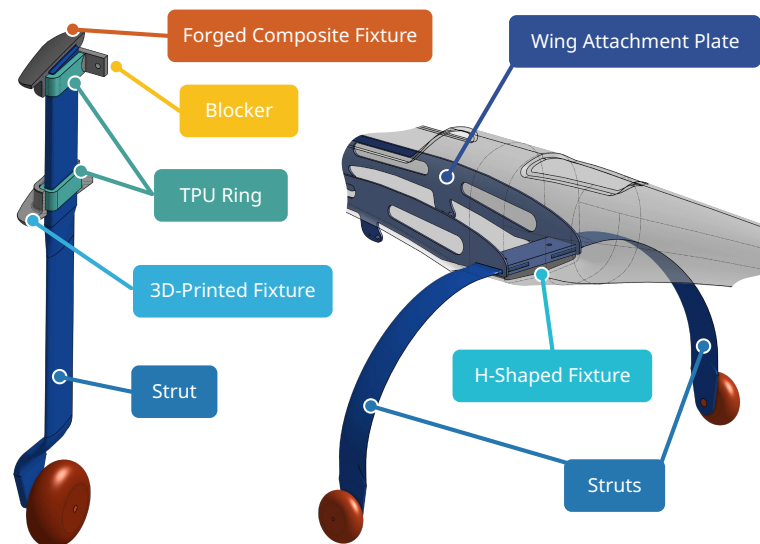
Front Landing Gear (left) and Main Landing Gear (right) Design
